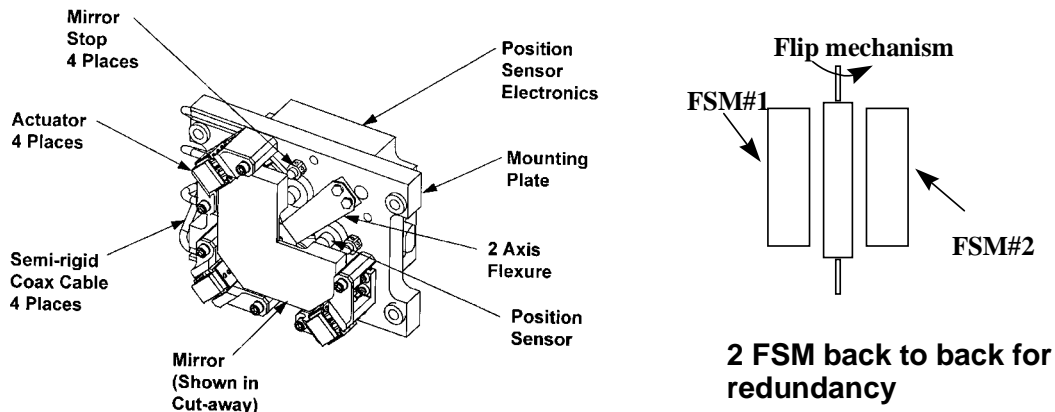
View of the fast steering mirror (left); for redundancy 2 FSM are mounted back-to-back on a flip mechanism (right)
